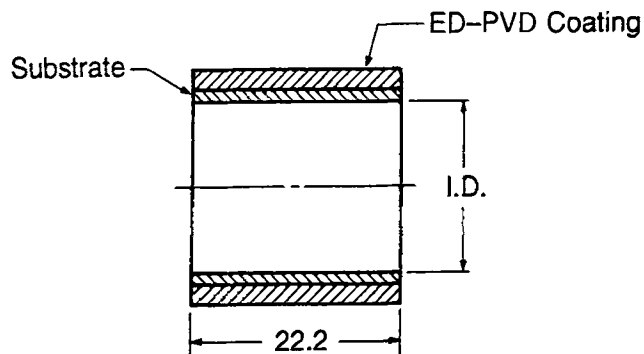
Composite compression specimen used in Phase 2 testing, with the TBC deposited on PWA 1480 substrate. Dimensions are given in millimeters.
